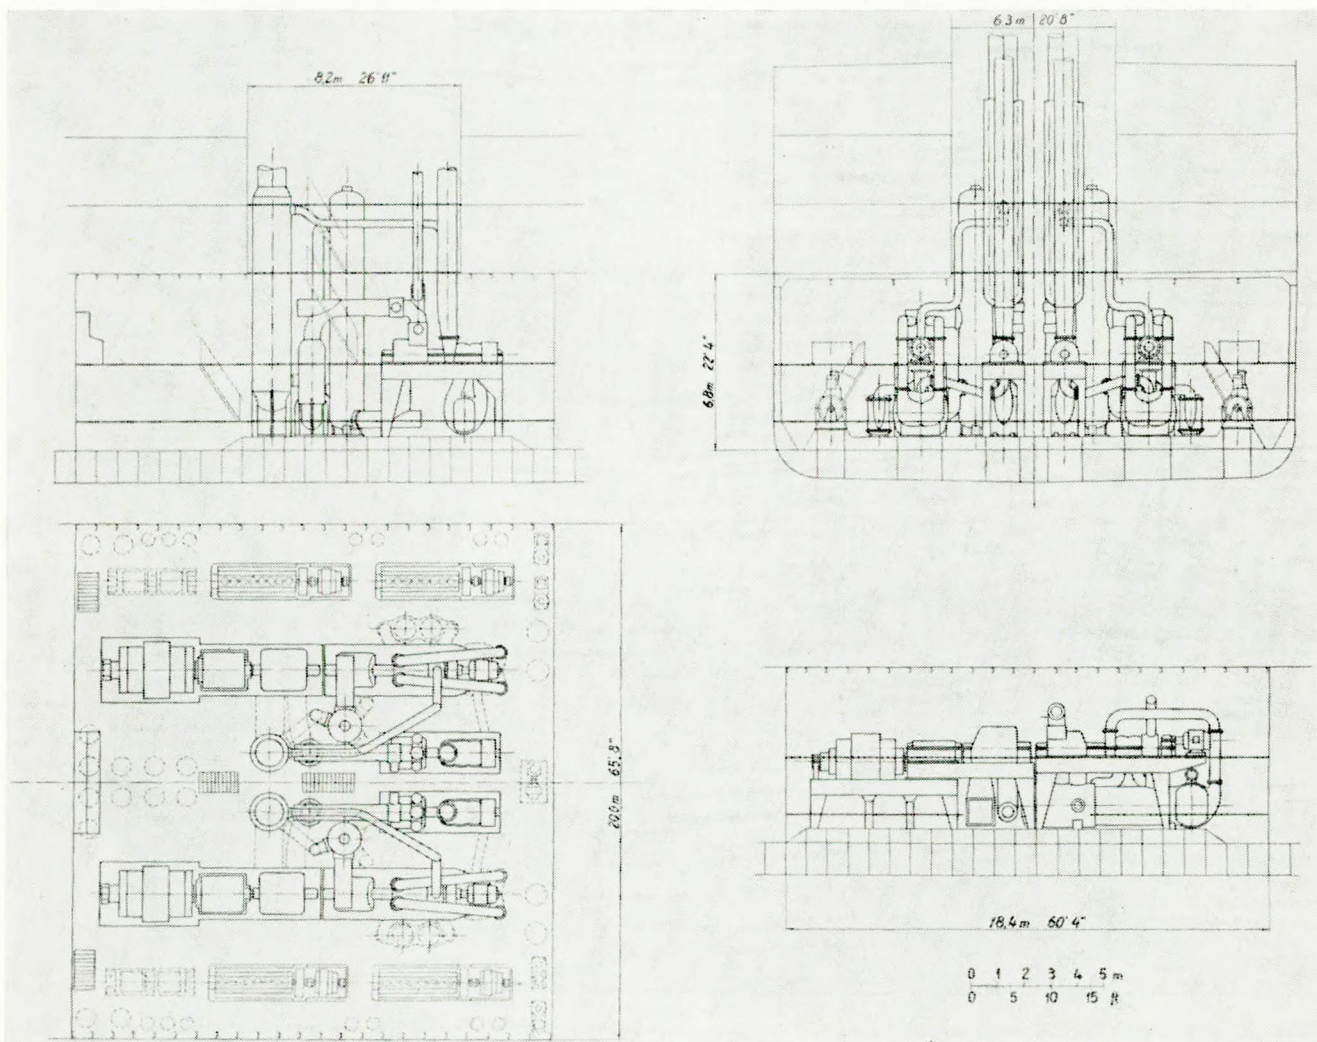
Machinery arrangement of 13,000-s.h.p. continuous service output twin-screw combustion turbine with electric drive; propulsion motors to be arranged in separate compartment.
